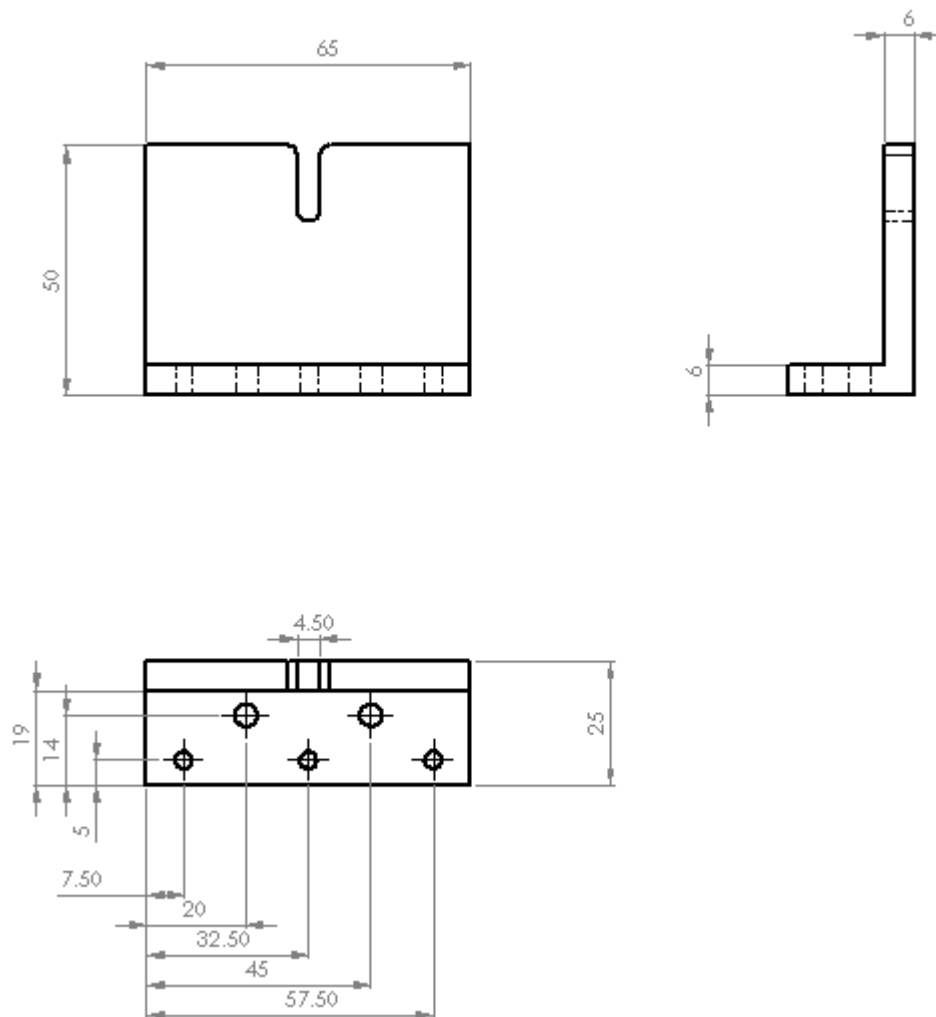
Technical drawing of the piezo actuator constraining plate.
